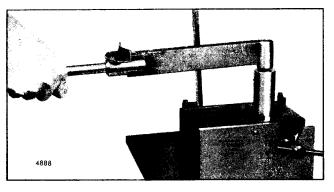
Tightening Injector Nut With Torque Wrench and Tool J 4983-01
